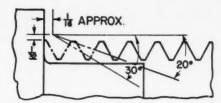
The angle of the thread chaser throat determines the width of the clearance groove.
